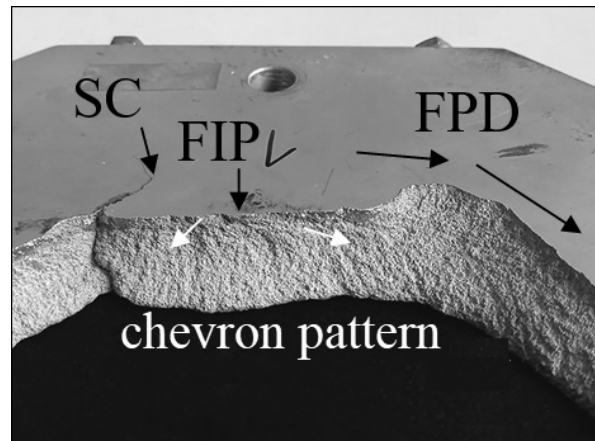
Plate-side fracture surface. FIP - fracture initiation point, FPD - fracture propagation direction, SC - secondary crack.
